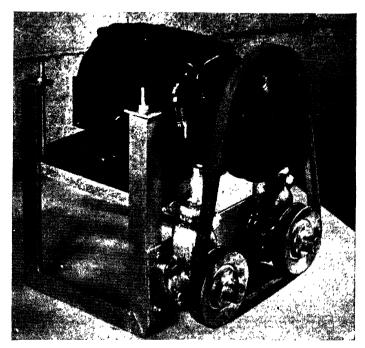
Ford pump installation. Note the ½ h p. electric motor mounted above; the large pulley on its shaft to increase pump speed—and the two small pumps side by side below. Pumps must always be kept below the tank levels so they will be primed. The belt is a standard fan belt from a Ford. Close examination will reveal that the motor is actually suspended by that long bolt from the top of the "L" beams. Any good welding shop should be able to duplicate this installation. (Courtesy Geo. J. Ball, Inc.)
